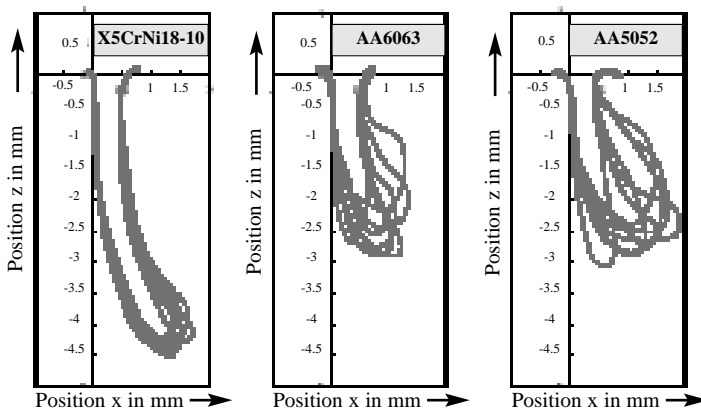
Overlays of the keyhole geometry taken from real-time X-ray analysis perpendicular to weld direction (x), showing increased instability in Aluminium welding. ($\lambda=1,06 \mu\text{m}$; $P_L=3 \text{ kW}$; $v=3 \text{ m/min}$; $z_f=0 \text{ mm}$; $f=100 \text{ mm}$; Ar)
